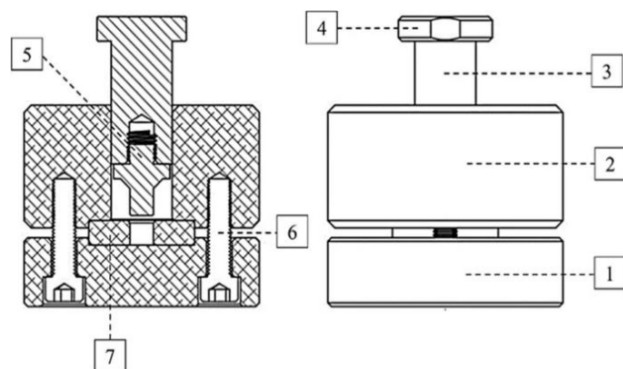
Schematic view of a tablet forming machine: 1. Lower jaw, 2. Upper jaw, 3. Piston, 4. The location of force application on the piston, 5. Mandrel, 6. Guide screws, and 7. Matrix [16].
